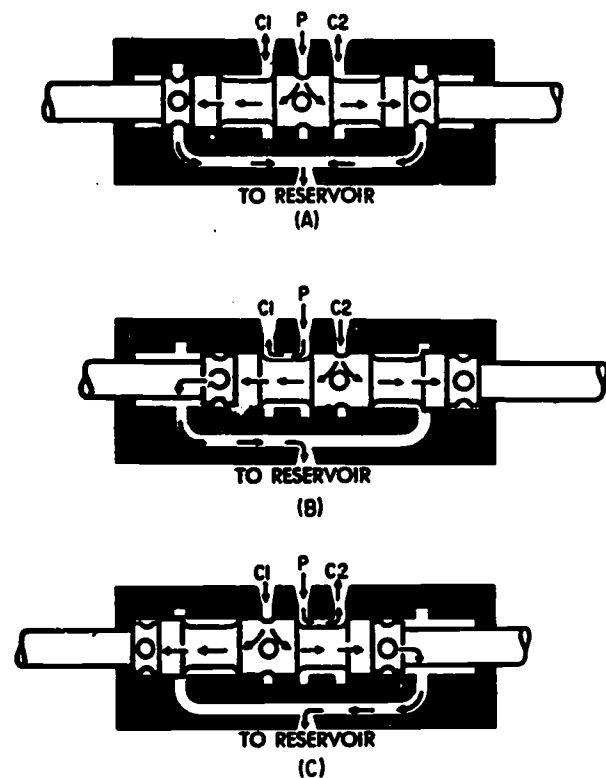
(B) shows the valve in a working position with the end of the sliding spool retracted. The detent spring is in the outboard detent, locking the sliding spool in this position. The lands have shifted inside the sleeve, and the ports are opened. Fluid under pressure enters the sleeve, passes through it by way of the drilled holes, and leaves through cylinder port (C2). Return fluid, flowing from the actuator, enters port (C1), flows through the sleeve, and is directed out the return port back to the reservoir or exhausted to the atmosphere. Fluid cannot flow past the spool lands because of the lapped surfaces.
